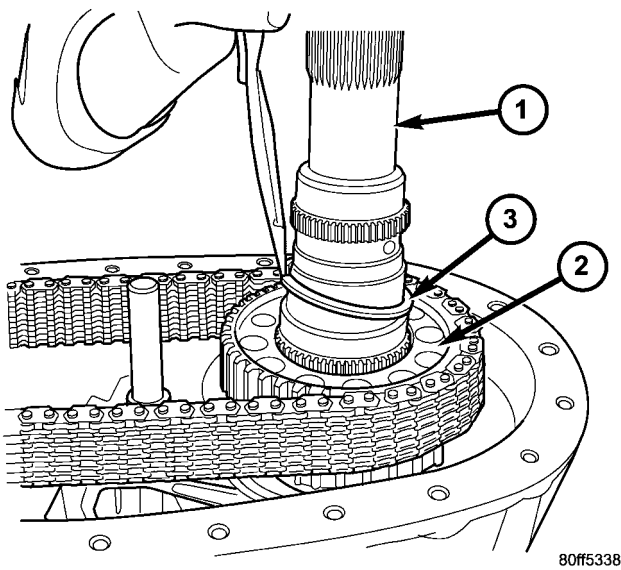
Install Rear Output Shaft Sprocket Retaining Ring
